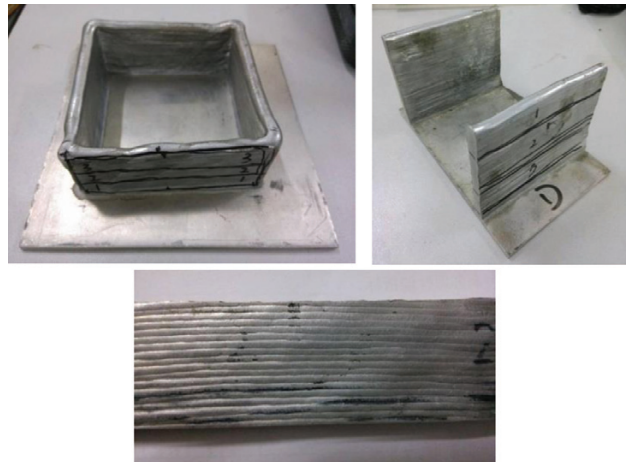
4043 aluminum alloy square and strip parts: a) square parts, b) strip parts, c) side of the 4043 aluminum alloy part
